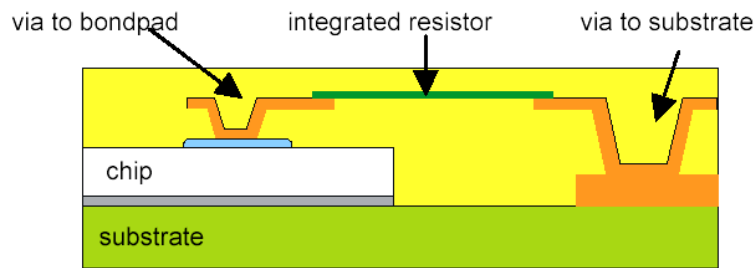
Chip-first embedded chip package -- Fraunhofer IZM [29]
